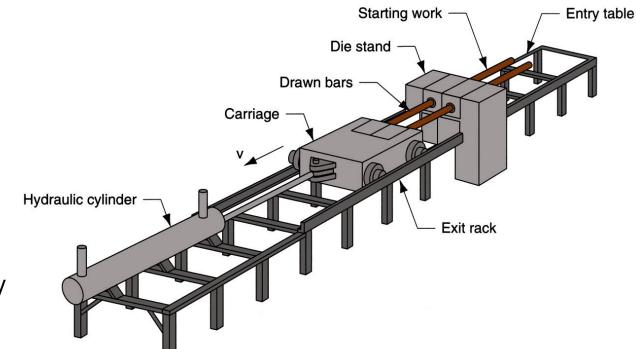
Hydraulically operated draw bench for drawing metal bars.
